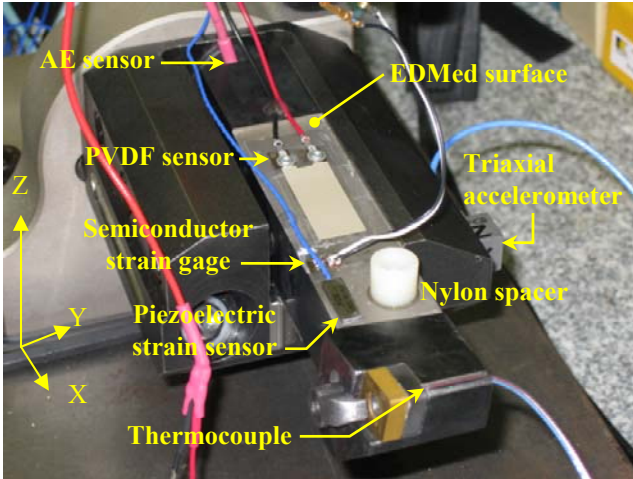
INSTRUMENTED INSERT HOLDER (SHANK)
